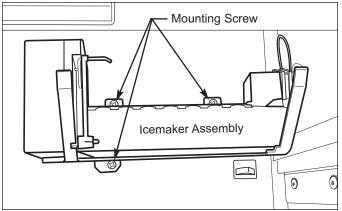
Icemaker Removal (700BCI-3/700BFI-3)
